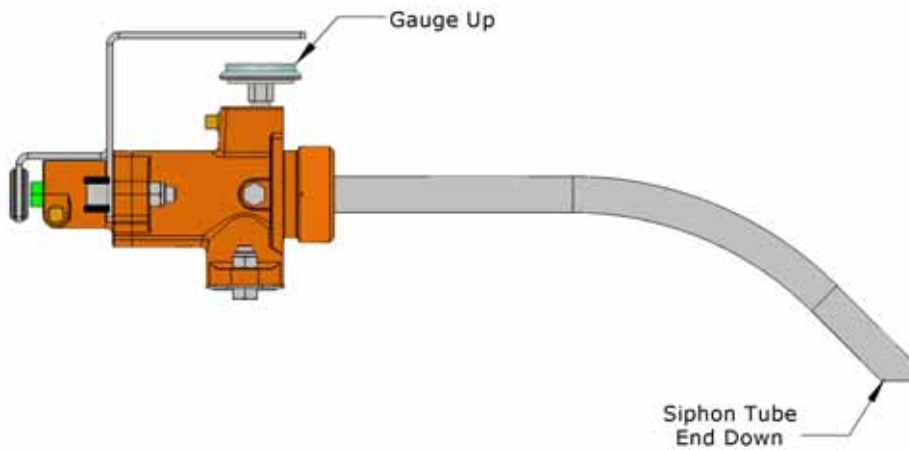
Orientation of Siphon Tube and Valve Gauge
